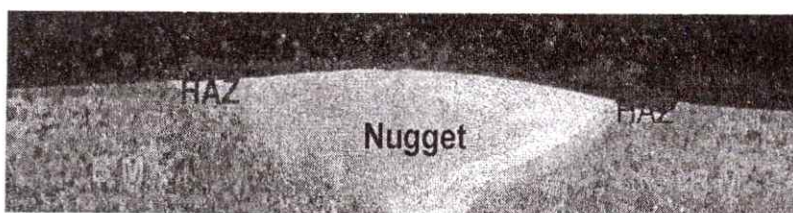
a) macro weld cross-section of AL6063 at (1400 r.p.m),4mm/min
